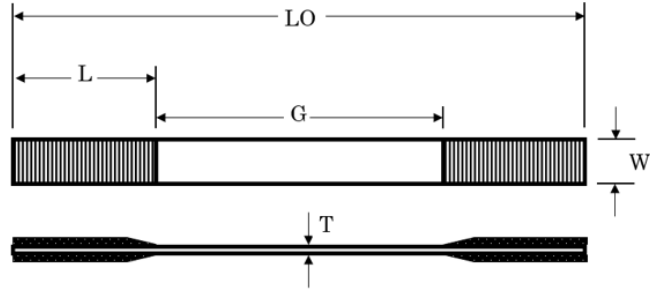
Schematic of the tensile test specimen geometry annotated with dimensions.
